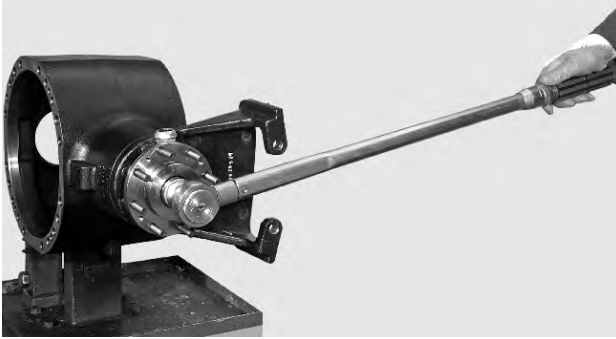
Apply wrench to the ring nut (1) and special tool T4 (See drawing T4 p. 67) to the pinion (11). Lock the wrench T4 (See drawing T4 p. 67) and rotate the pinion using a dynamometric wrench, up to a minimum required torque setting of 880 - 1100 N·m.
